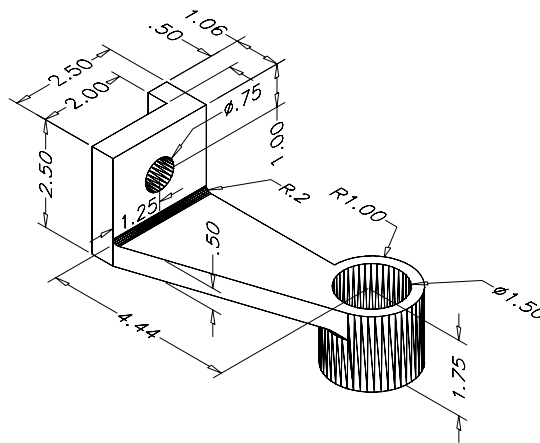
Drawing for Exercise 14: draw the front view with offset section
